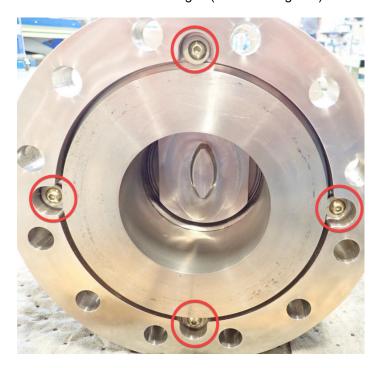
Inlet Sleeve Assembly Screws (circled in red)
